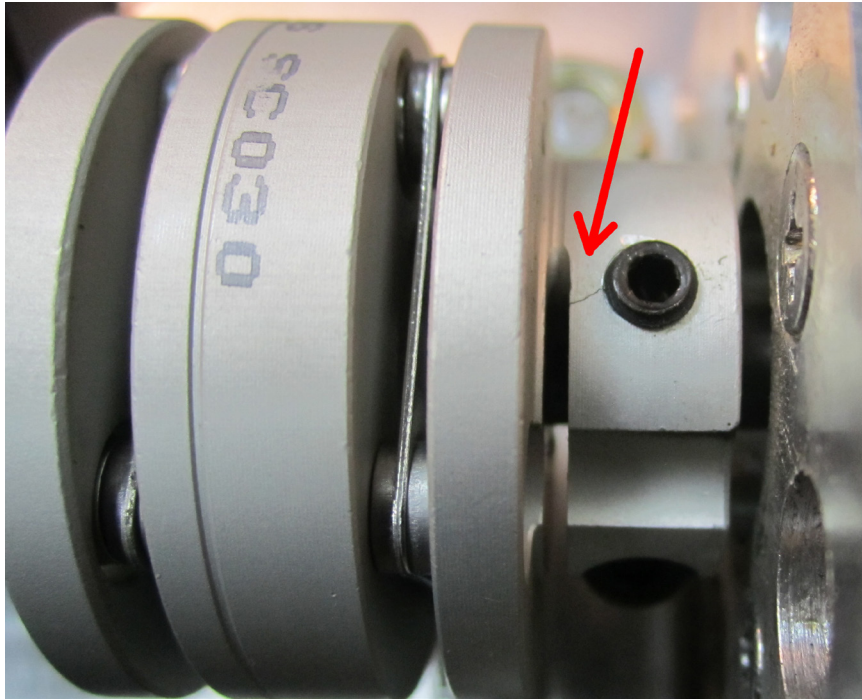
Coupler at iteration 5, motor end shown. Note stress fracture to left of set screw.
